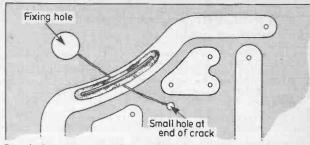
Board cracks often radiate from a fixing hole and break nearby tracks. Repair with a wire bridge and drill a small hole at the end of the crack to prevent it spreading.
